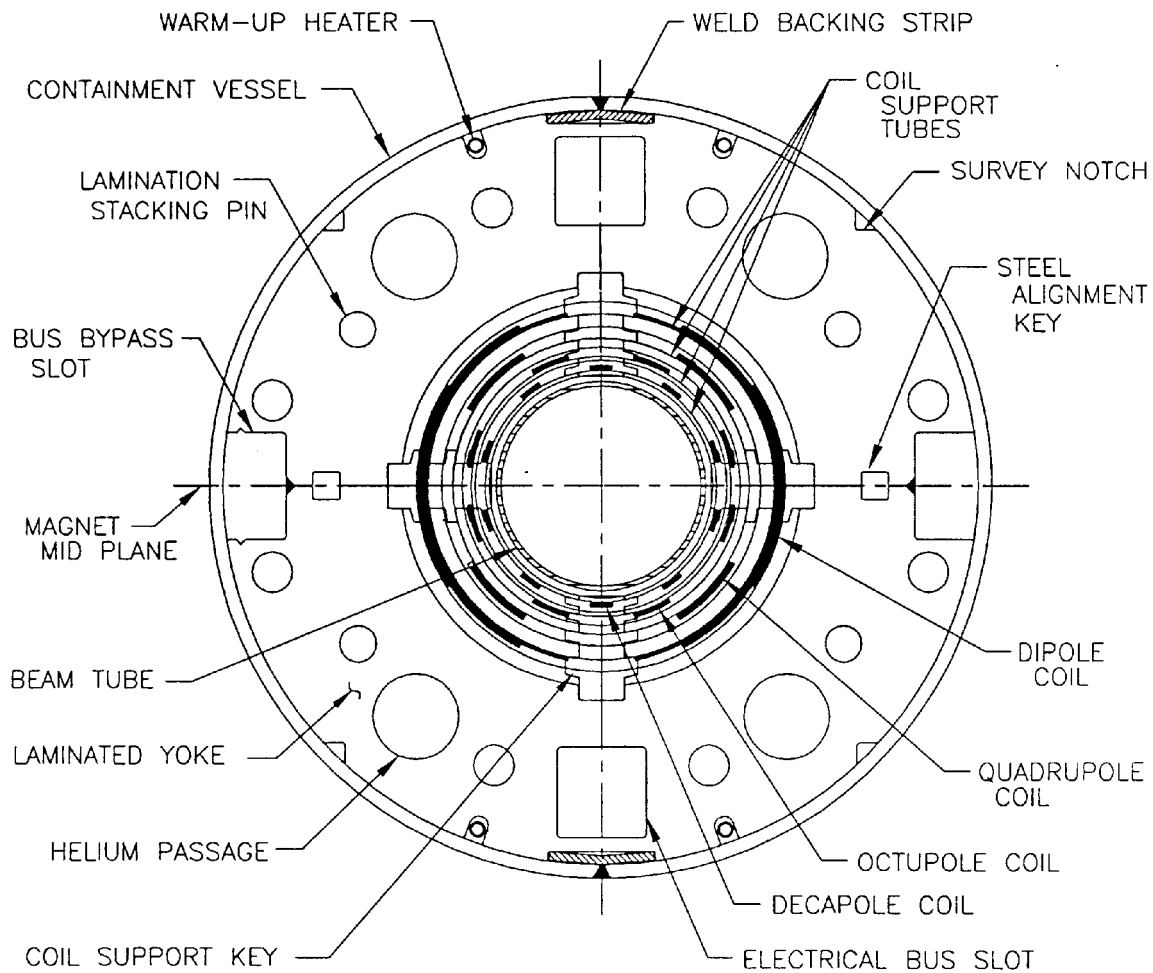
Arc corrector cross-section (beam tube i.d. = 69 mm).
